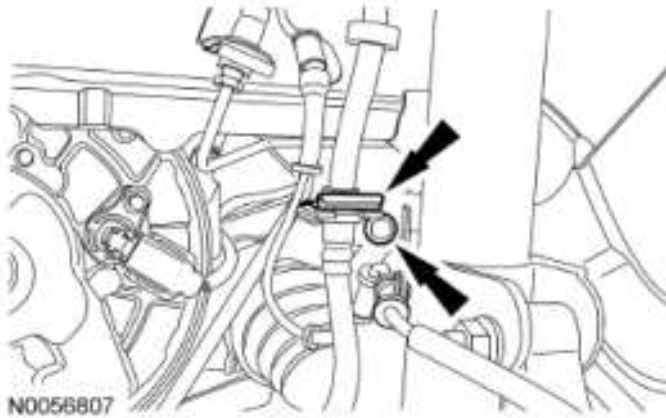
Locating ABS Sensor Retaining Bolt And Brake Hose Retainer
